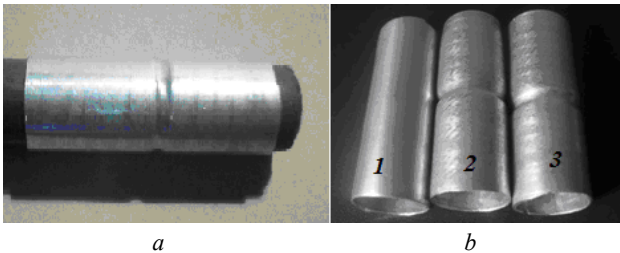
Permanent joint of a dielectric rod and a tubular metal part (a), a workpiece and parts removed by «cut» pulses (b)
